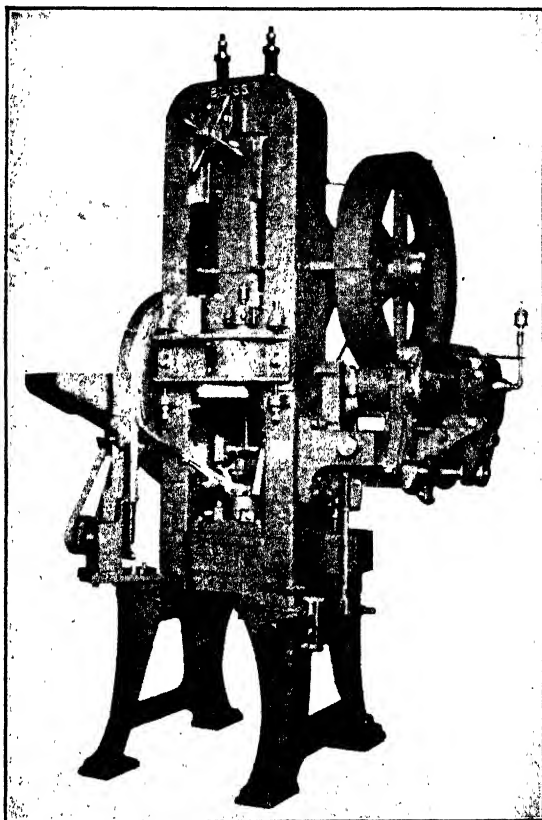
A typical collapsible tube press of the knuckle-joint type with hopper feed and automatic swinging arm punch holder.
